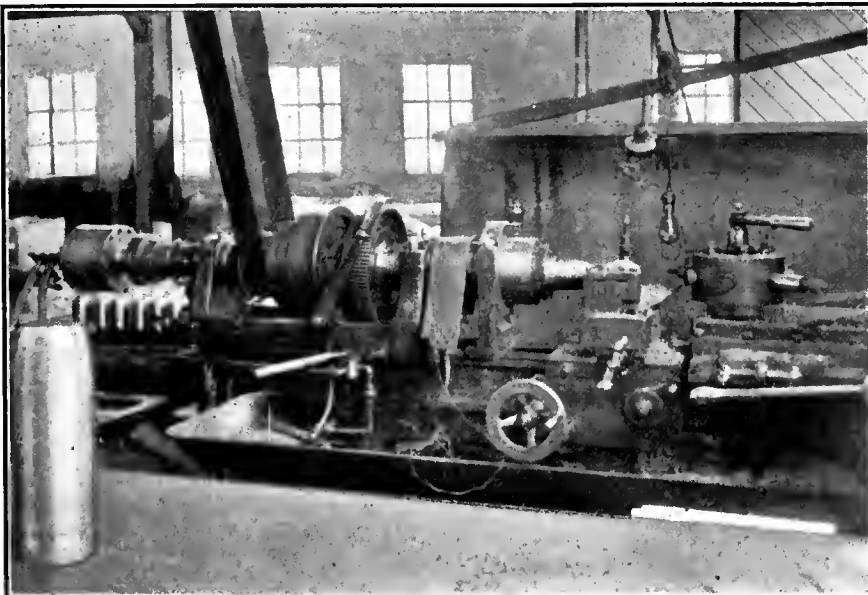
FINISHING BRASS SOCKETS ON A WINDSOR MACHINE CO. TURRET LATHE.
